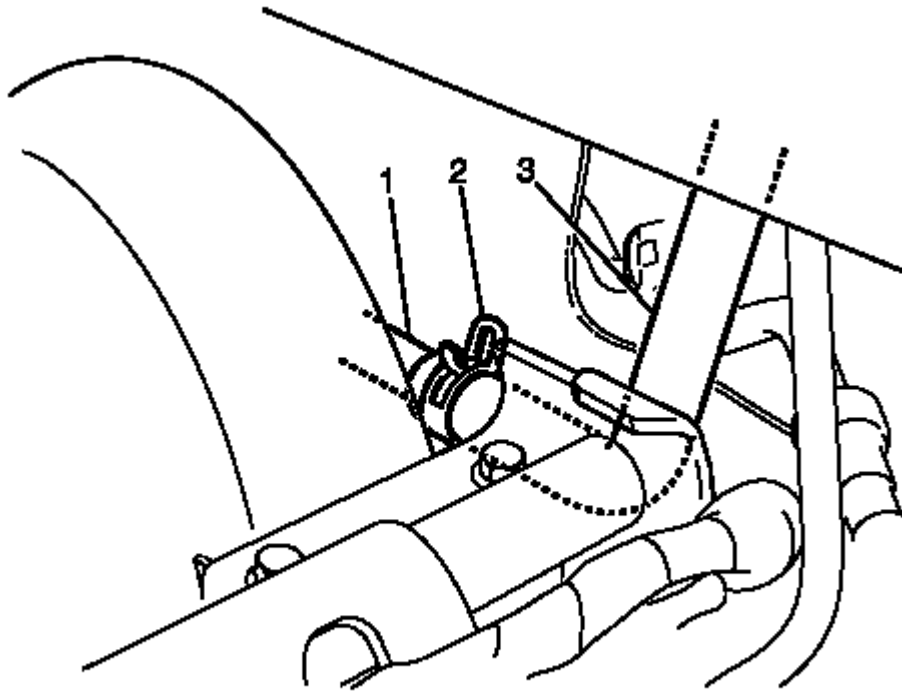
Identifying Intake Manifold Vacuum Port, Vacuum Hose & Retaining Clamp
